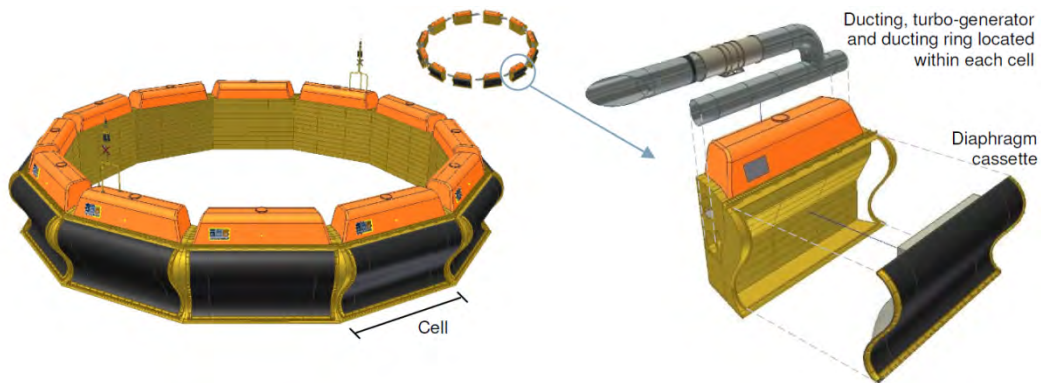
General 3D arrangement of device and exploded view of one of twelve cells
